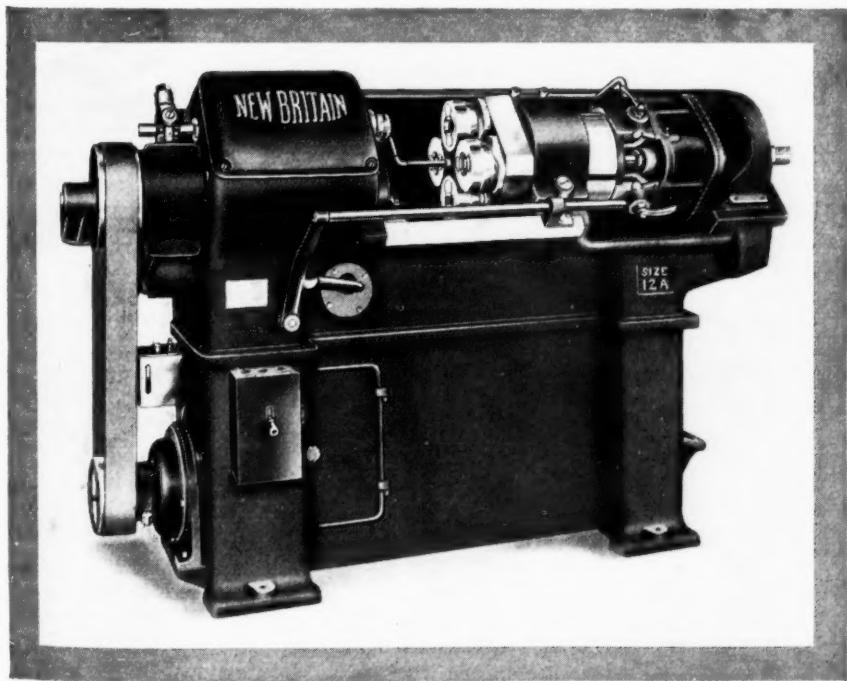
Front view of new chucking machine, showing convenience of arrangement for loading and control
